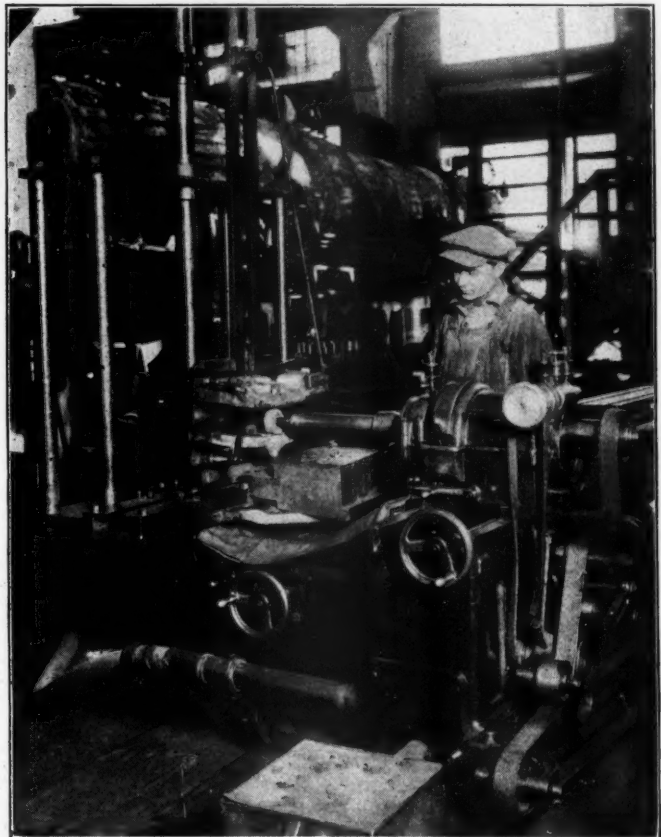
Attachment used on an internal grinder for grinding the radius on a valve link
